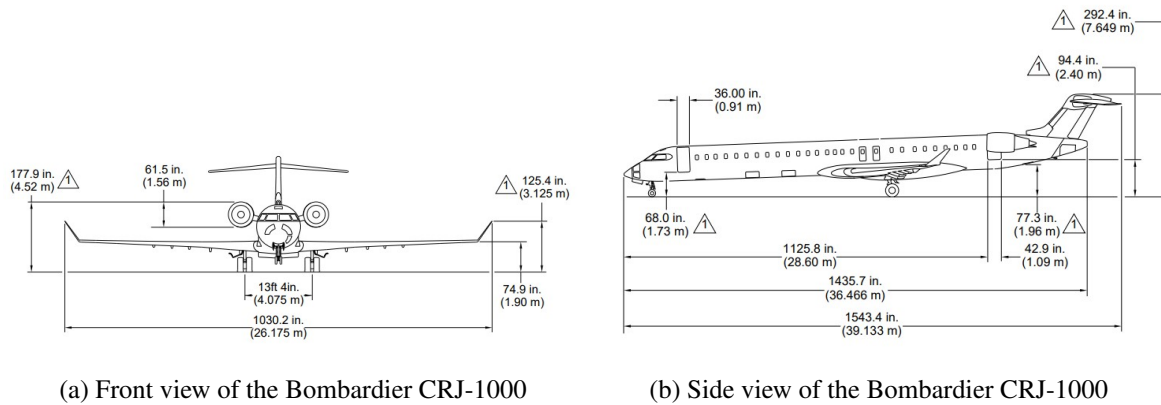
Technical Drawing of the Bombardier CRJ-1000 [1]
